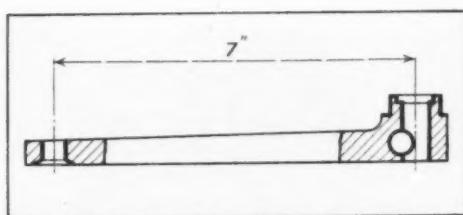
Typical Bicycle Crank Machined at Each End on a TOS-Kurim Unit-head Machine
